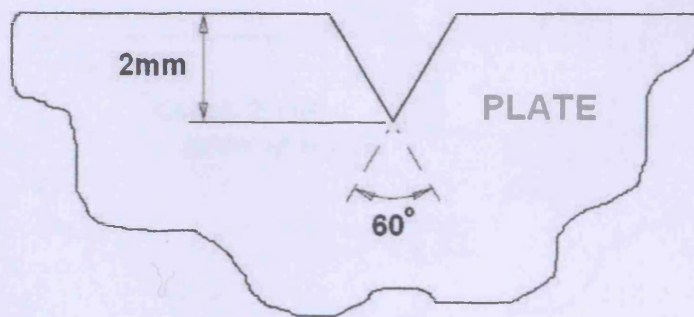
V-shape fine cut on an edge of the specimen to initiate a crack.
